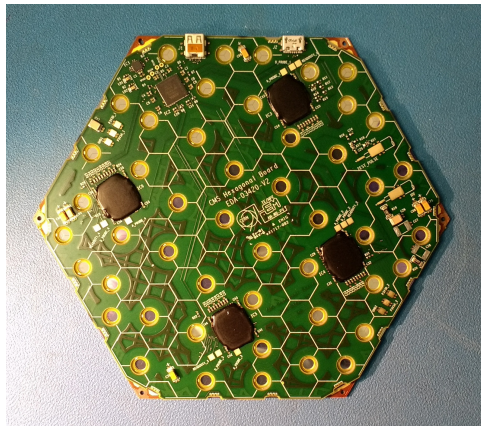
Six-inch module on carrier plate prior to wirebonding and encapsulation. The electronics packages seen on the PCB are four SKIROC2-CMS front end readout chips, used for the beam test, and an FPGA. The corners of the PCB and the sensor under the PCB are removed to provide direct access to the mounting holes on the baseplate.
